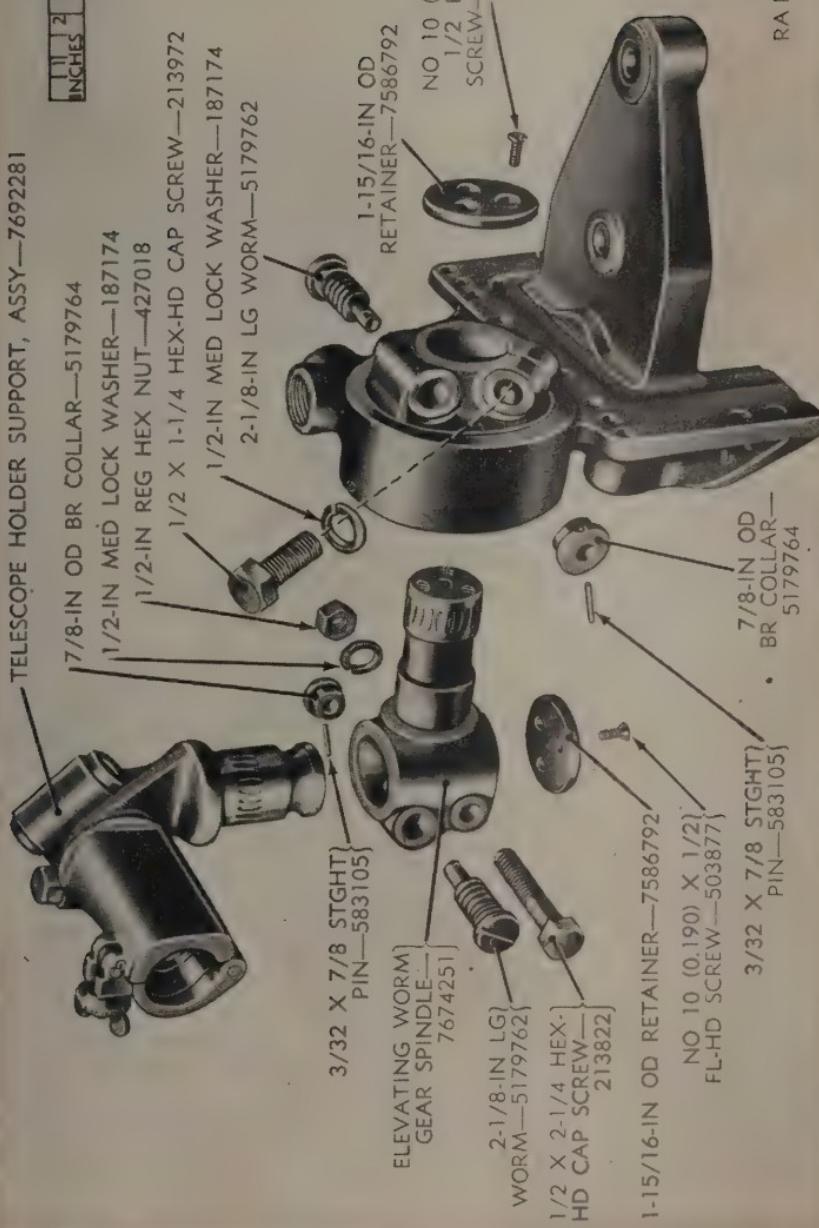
Telescope mount M32—removal of the elevating worm and related parts—exploded view.
